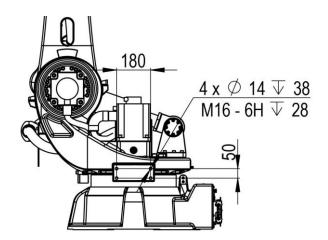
Specification and size of the installation hole of shoulder equipment of AIR165-2750A manipulator
